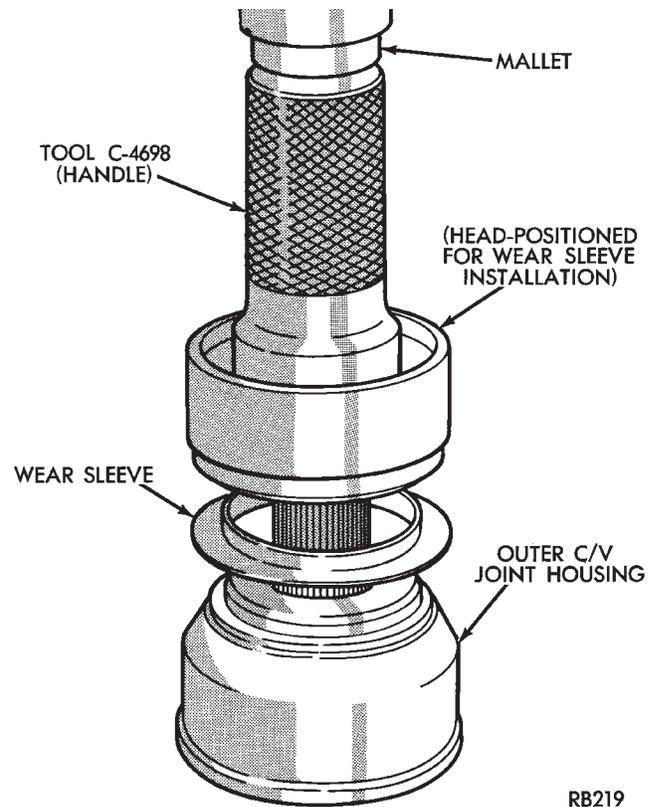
Tool Set-Up for Wear Sleeve Installation
